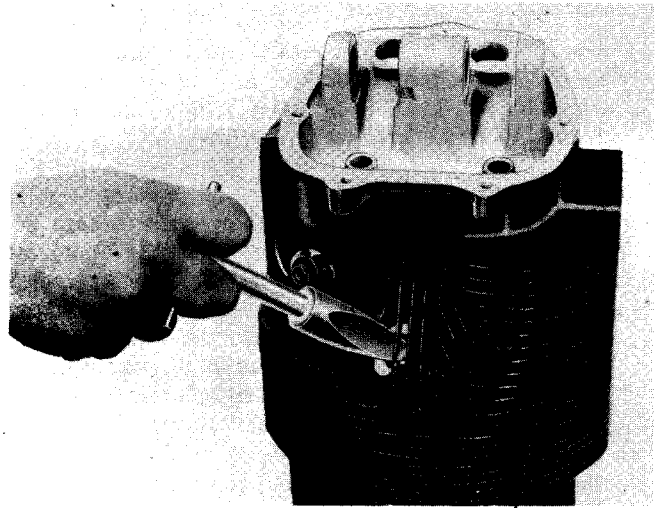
Removing Spark Plug Hole Heli-Coil Insert
